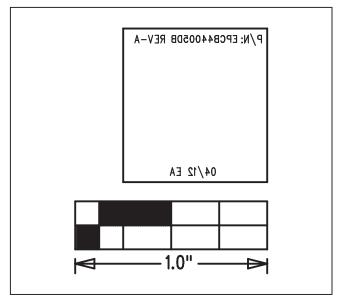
MAX44005 Daughter Board Component Placement Guide—Bottom Side
